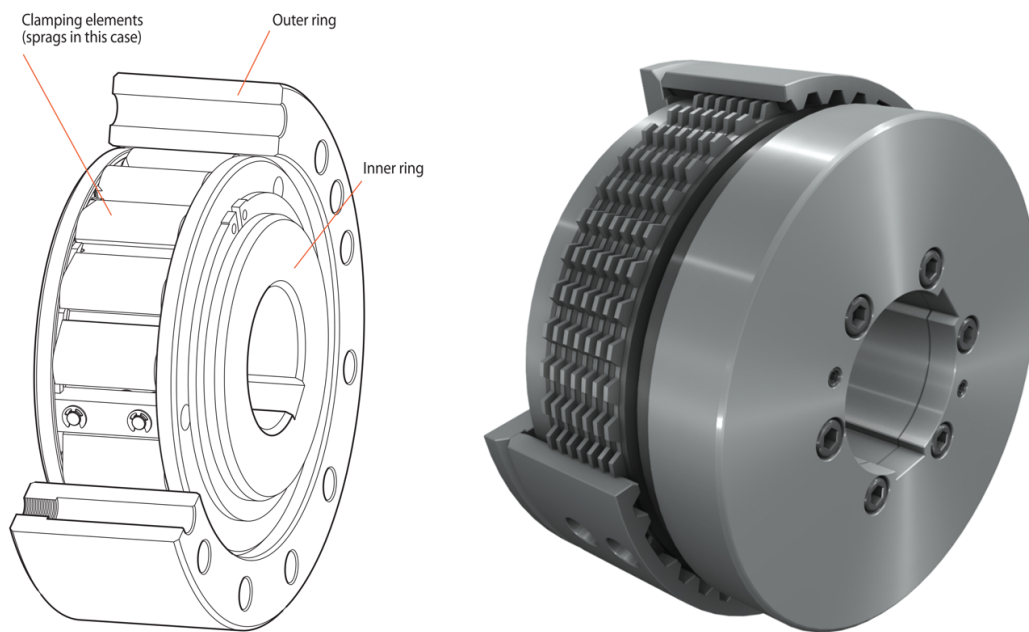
(a) A free-wheel mechanism and (b) the multi-plate clutch [9, 10].
